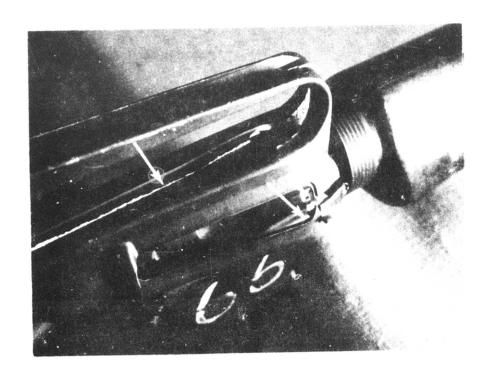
Side view showing fractured upper receiver housing, cracked carrying handle and closed bolt.
